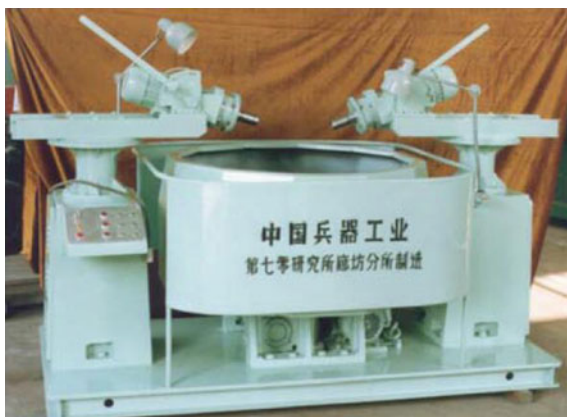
Photograph of parallel spindle barrel finishing equipment
